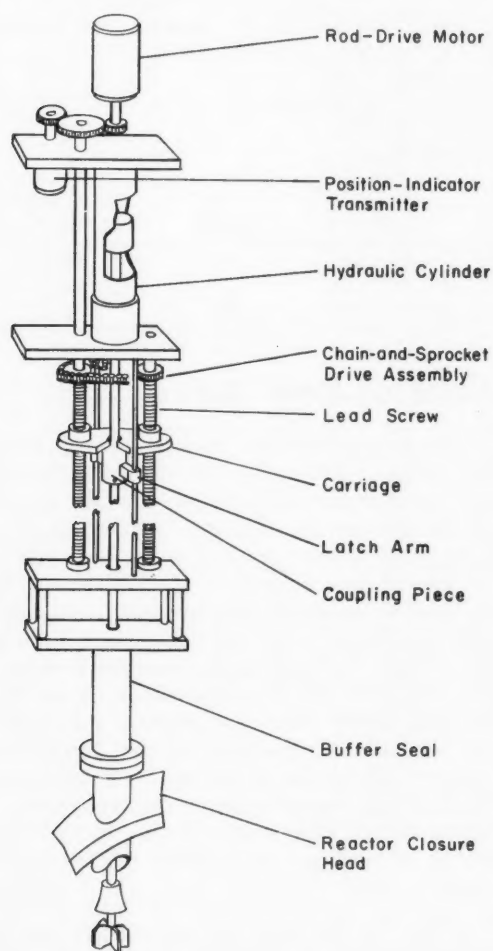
N.S. Savannah reactor control-rod drive mechanism.
